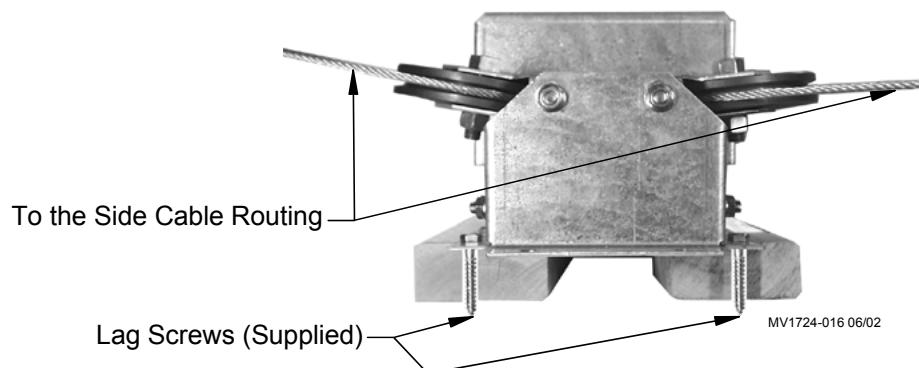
Adjusting Swivel Angle (Cable Version Shown)
